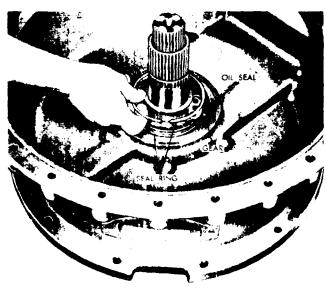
C-16. Removing (or Installing) Seal Rings from Ground Sleeve
